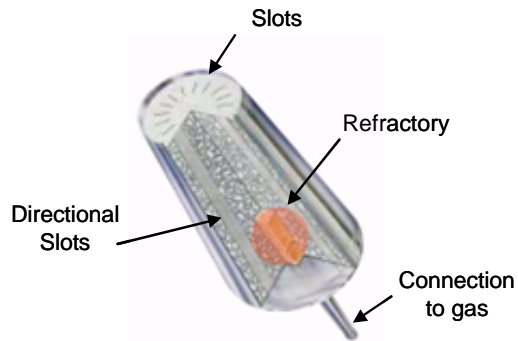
Schematic drawing of a directional plug to stir. Website:
